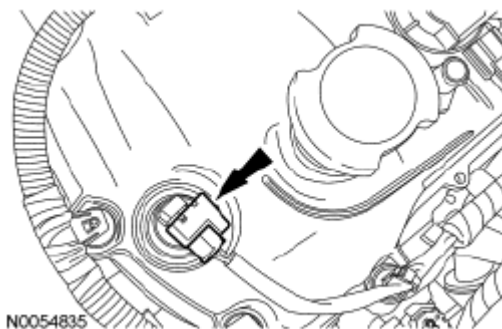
Locating LH VCT Solenoid Electrical Connector
